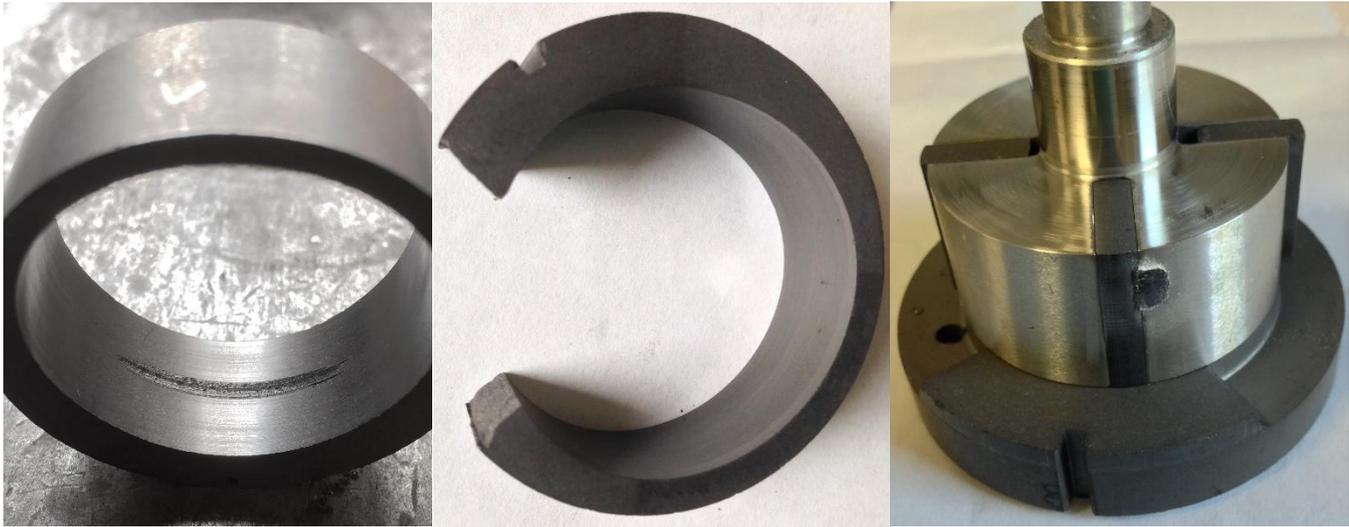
Examples of damage caused by debris in the pump: Gouged Liner (left), Cracked Liner (center), Rotor jammed by debris (right)
